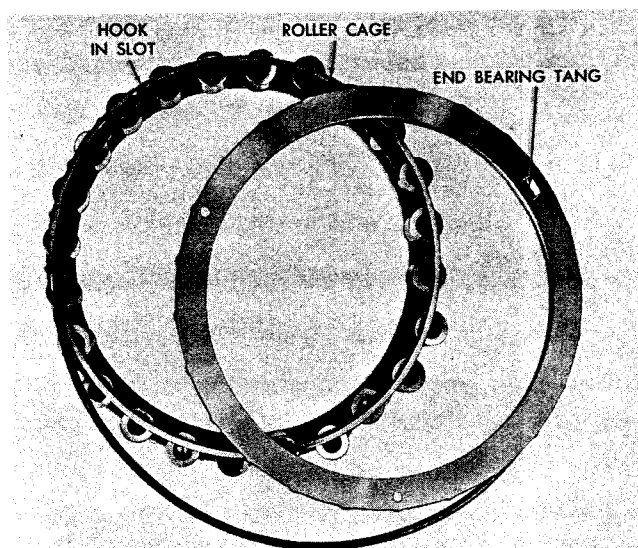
Starting spring and end bearing on roller cage (in units with S/N 101 through 151)
